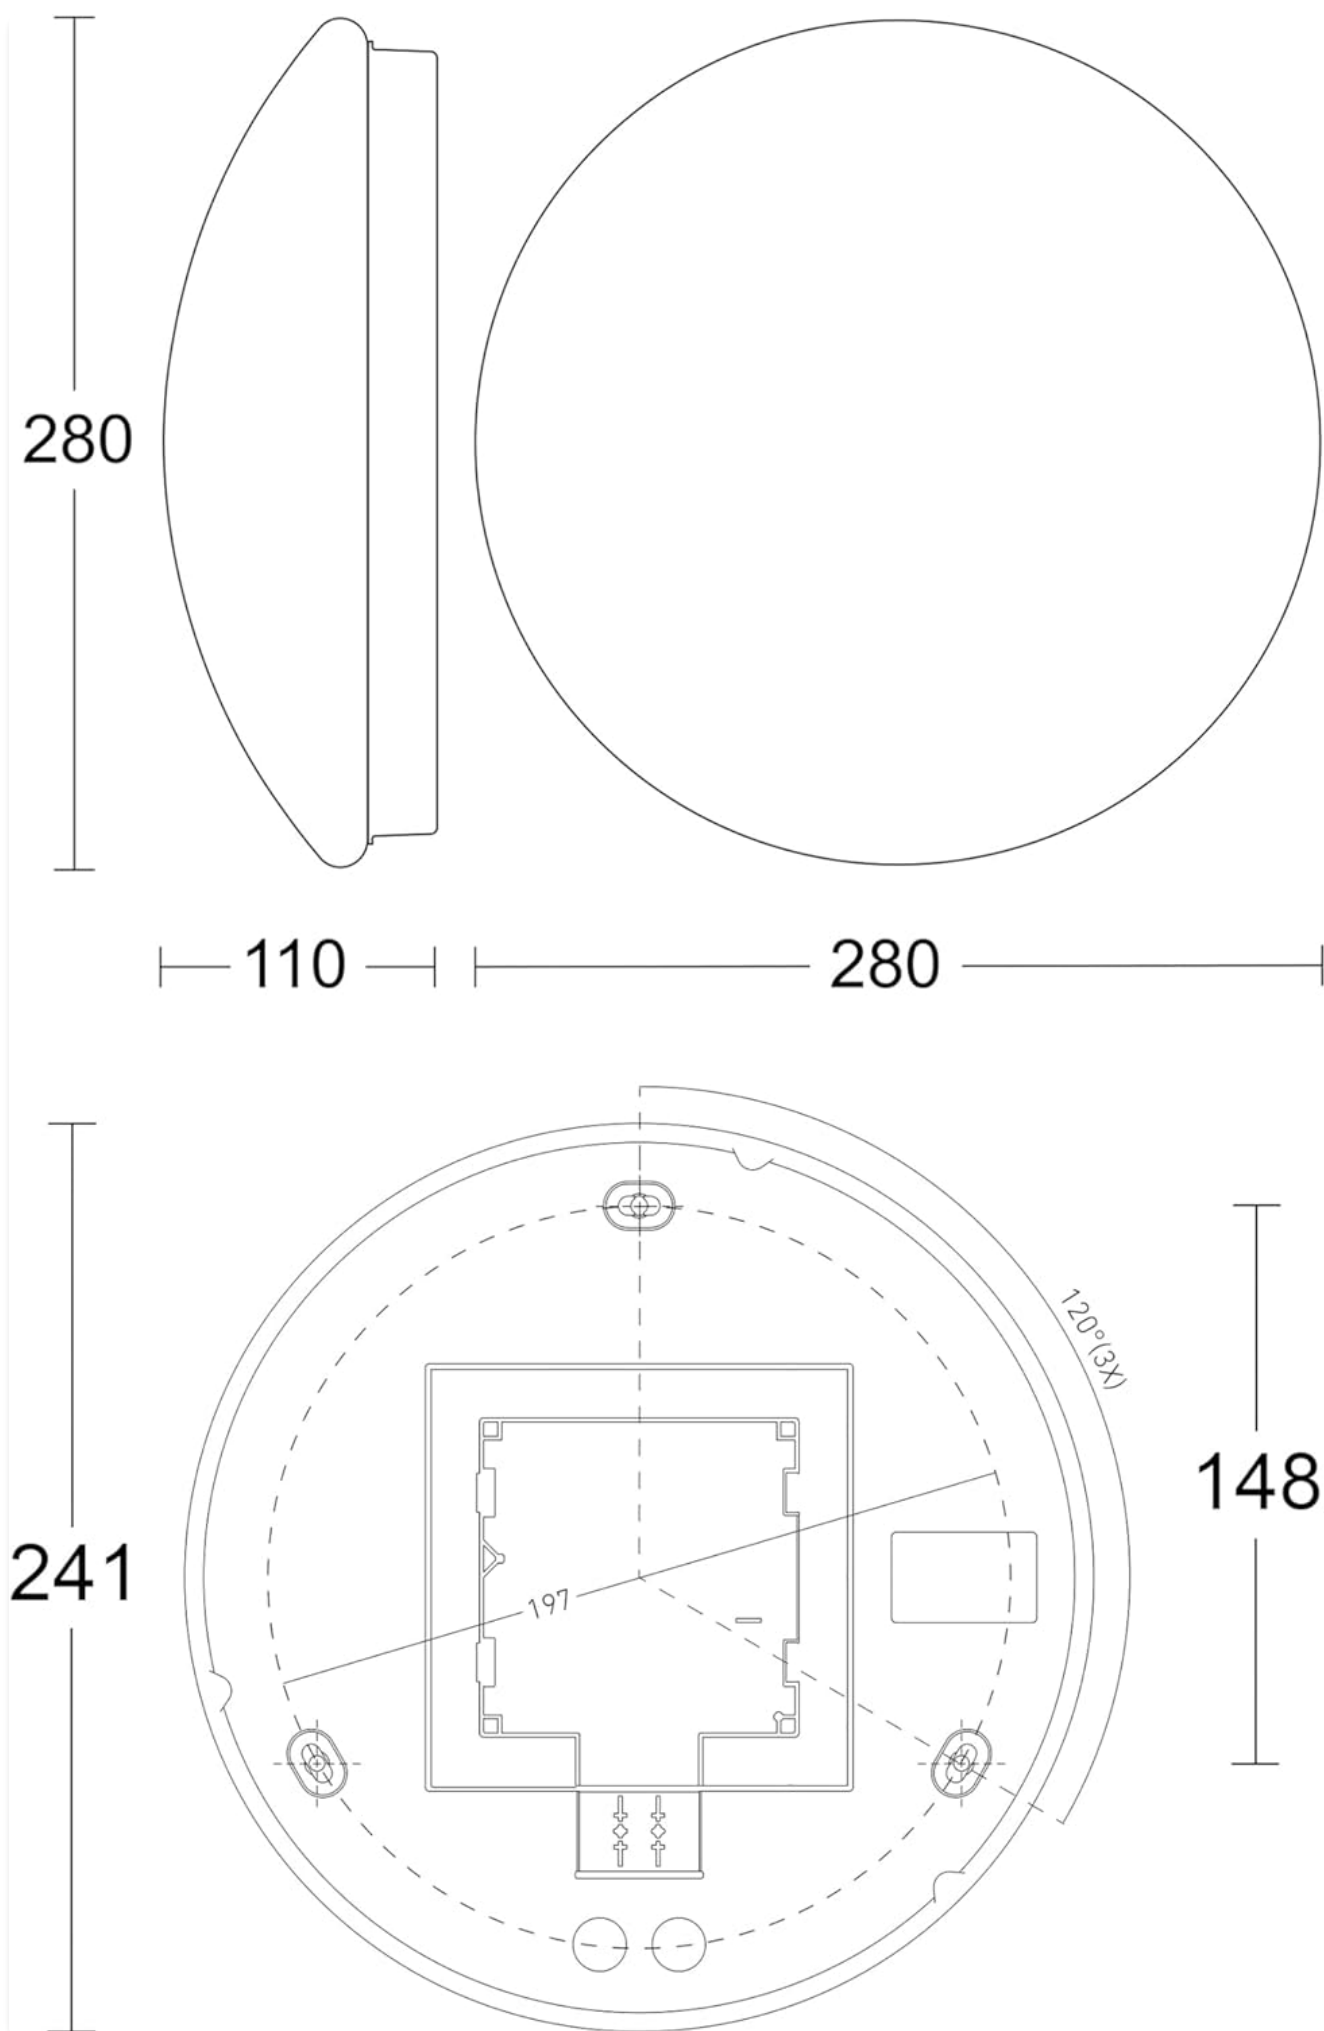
Technical drawing with dimensions (280mm diameter, 110mm depth) and mounting points.
